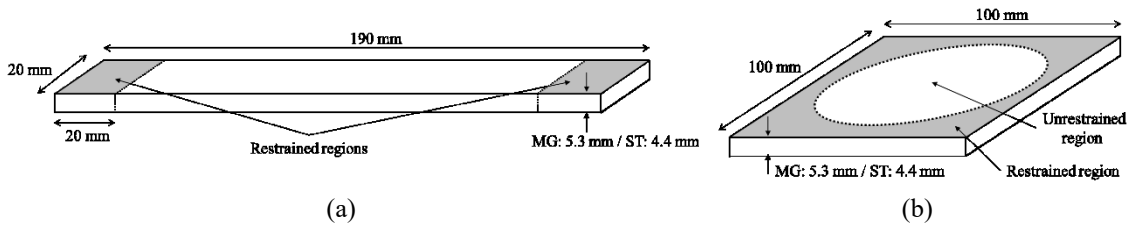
Configurations of (a) the static buckling and axial impact test specimens, and (b) lateral impact test specimens (drawings are not to scale).
